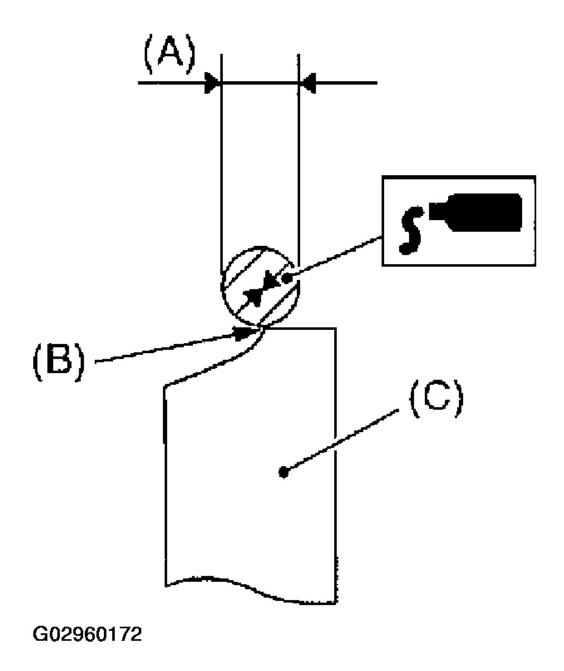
Applying Continuous Strip Of Liquid Gasket Along Edge Of Camshaft Cap Mating Surface
